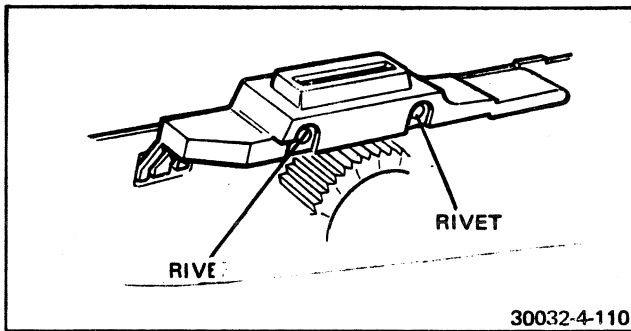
PILLAR SOCKET RIVET LOCATIONS
